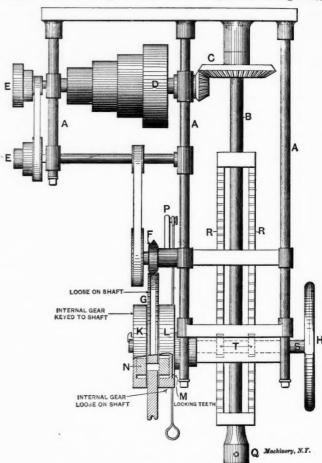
SUSPENSION DRILL WITH EPICYCLIC FEED,
